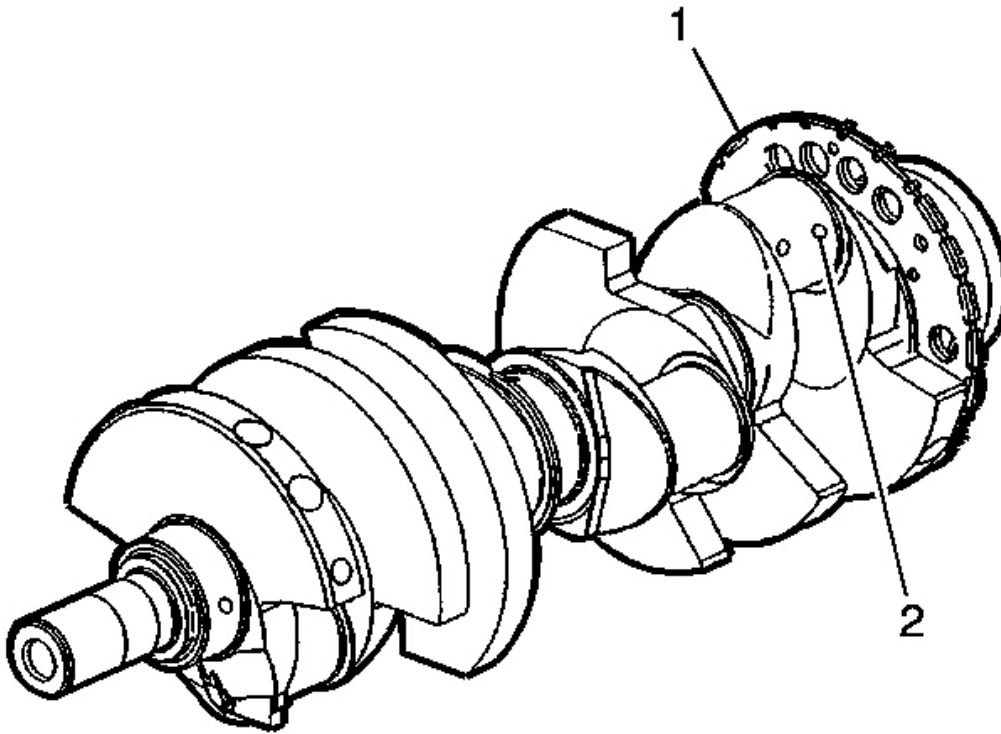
View Of Oil Passages & Crankshaft Position (CKP) Sensor Reluctor Ring Teeth
